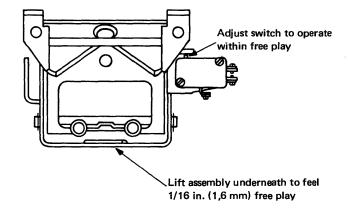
Adjusting Cartridge Interlock Switches [07541]
